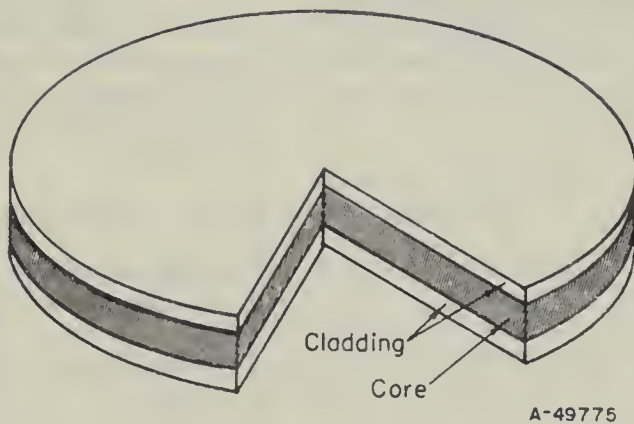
MULTILAYER COMPOSITE COIN BLANK
